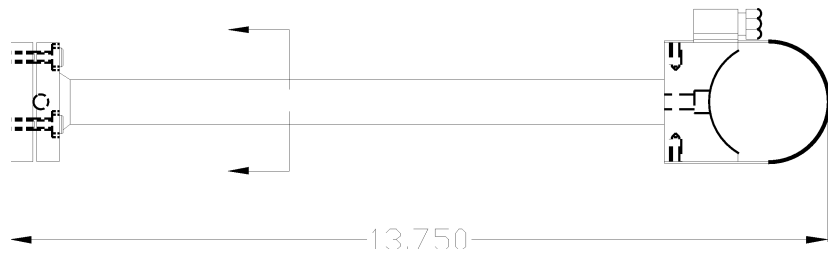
Struts with mounting hardware. The boss, welded to the tank wall, is on the left; the clamp for holding a lat section is on the right.
